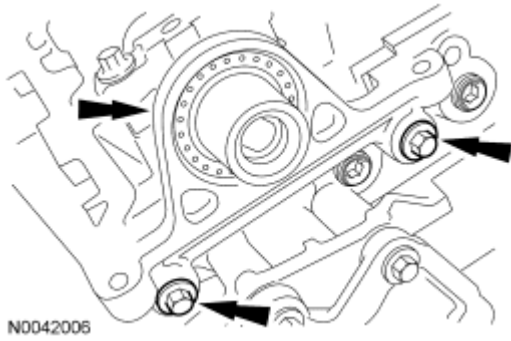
Locating Camshaft Oil Seal Retainer And Bolts
